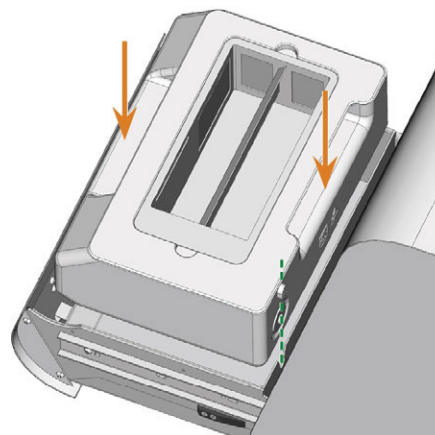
INSERTING THE COOLING LIQUID TANK INTO THE DRAWER
